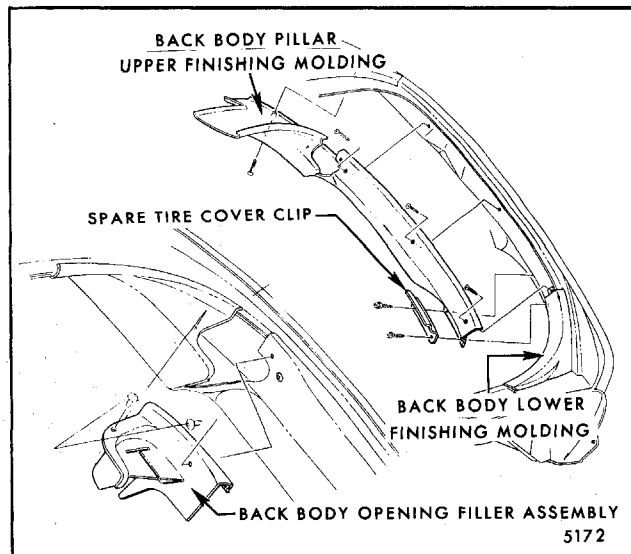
Back Body Pillar Upper Finishing Molding - Right Side Shown
